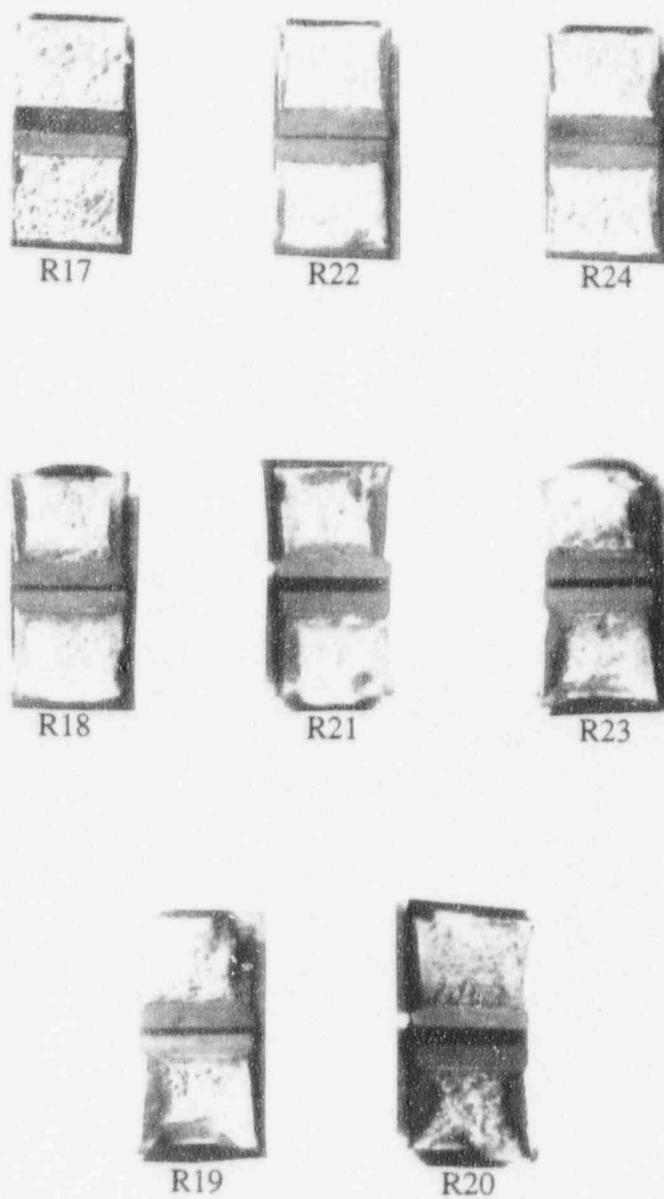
Charpy Impact Specimen Fracture Surfaces of the Prairie Island Unit 1 Reactor Vessel Correlation Monitor Material
